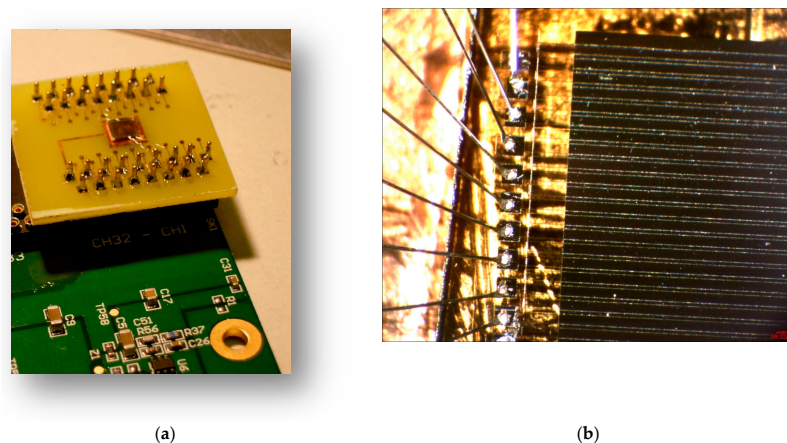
(a) The detector mounted in the detector headboard (XNAS-DH), electrically connected to an ad hoc printed circuit board. (b) Detail of the electrical connections, which were achieved via micro-wire bonding using a 25 μm diameter aluminum wire.
